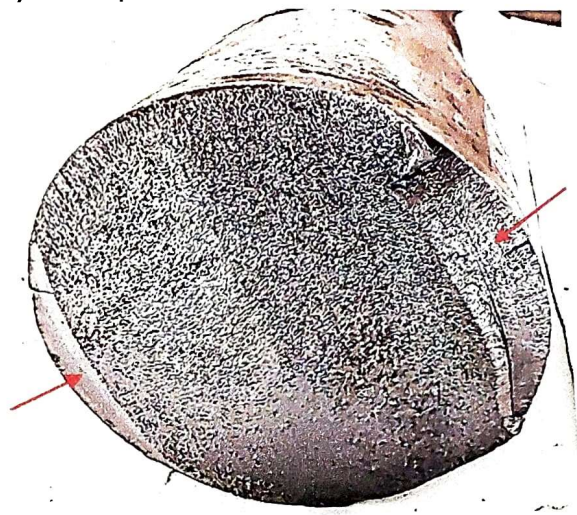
(b) showing fracture face (fatigue zone) of sample no. 153/23/2.
